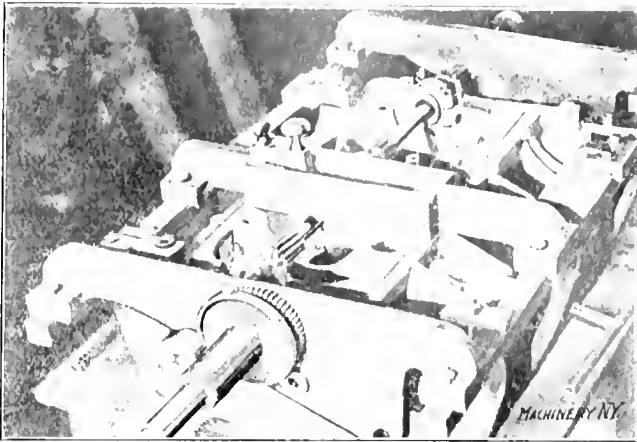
Reaming Jig for Hand Reaming Crank-shaft Bearings after the Boring Operation
